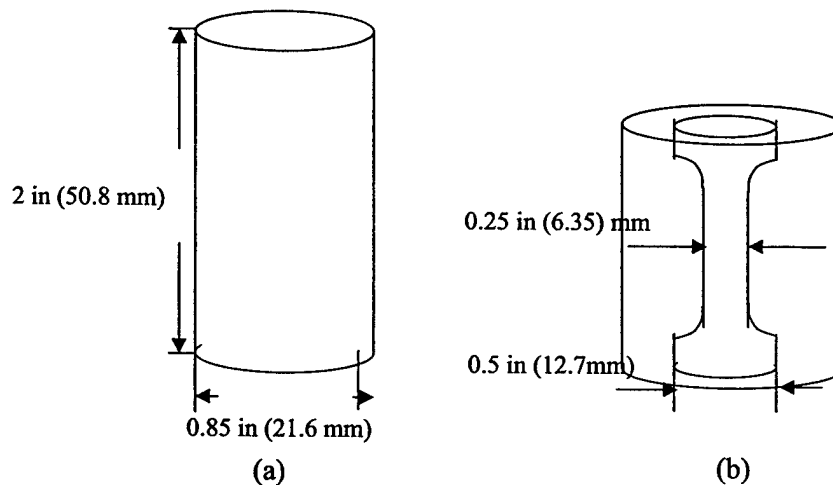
Specimens (a) compression specimen (b) tension specimen machined from the compressed specimen.
